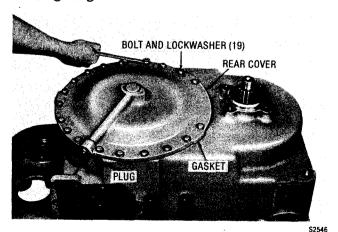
Removing transmission rear cover (TT 2221-1, 2421-1 without converter-driven PTO)
